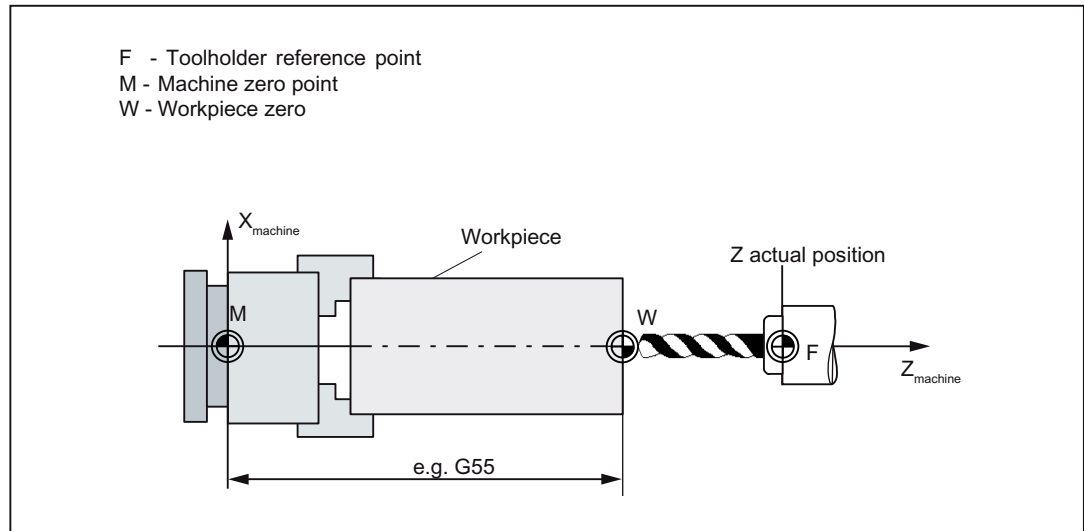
Determining the length offsets using the example of a drill: Length 1 / Z axis
